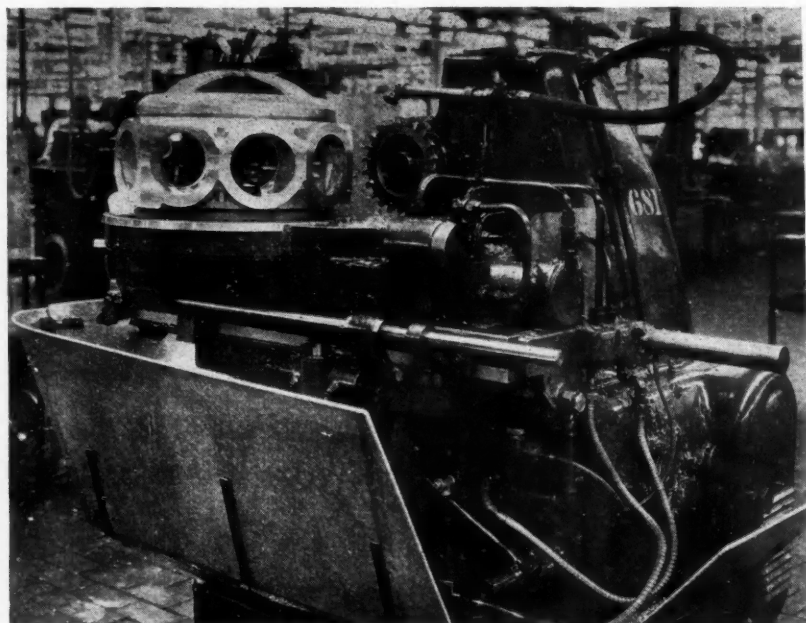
Sundstrand-Rigidmil set-up for milling nine-cylinder pads on the main crankcase + + +
